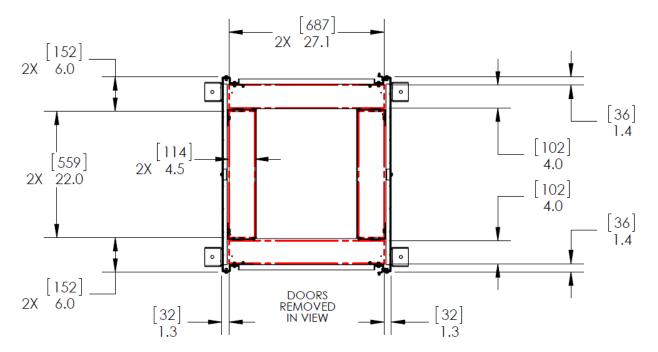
CONDUIT ACCESS (AND CLEARANCE) ON BOTTOM (VIEW FROM INSIDE CABINET)
